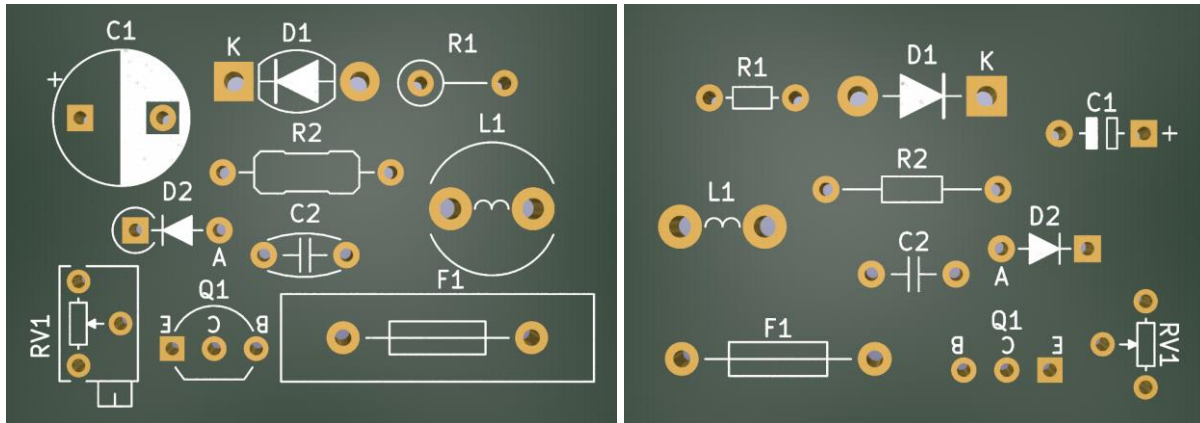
"Double" footprint examples. PCB top view (left) and bottom view (right).
